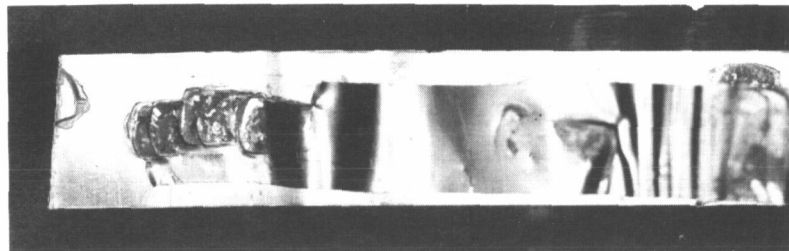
Back Surface, Showing Apparent Weld Area Penetration or Pressure Points.
